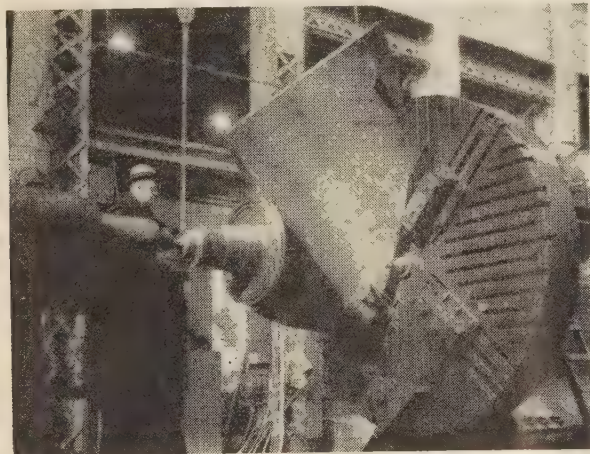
BLADE FOR 14-FT 9-IN. MARMET RUNNER
